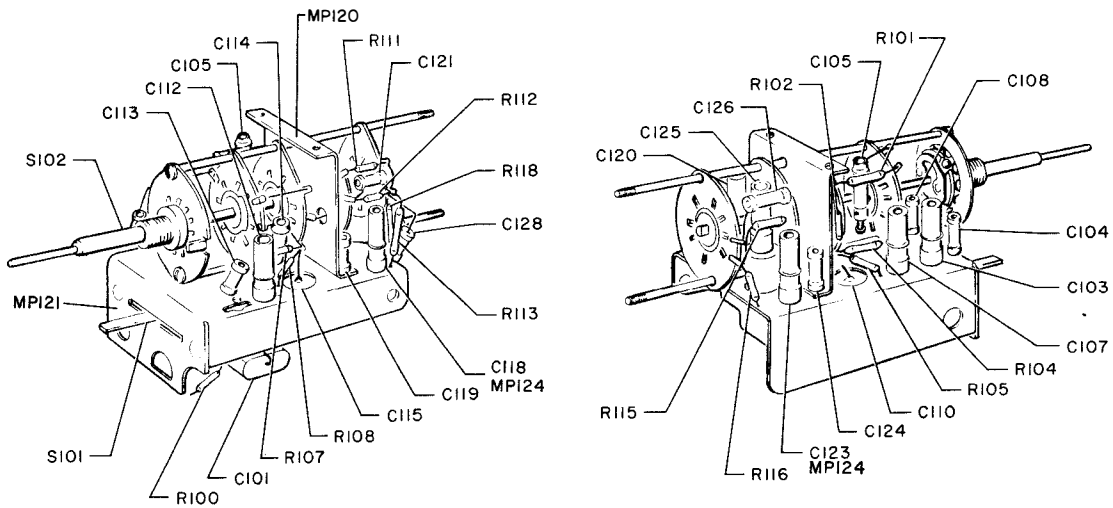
Channel A Attenuator Assembly A2A1, Location of Parts
